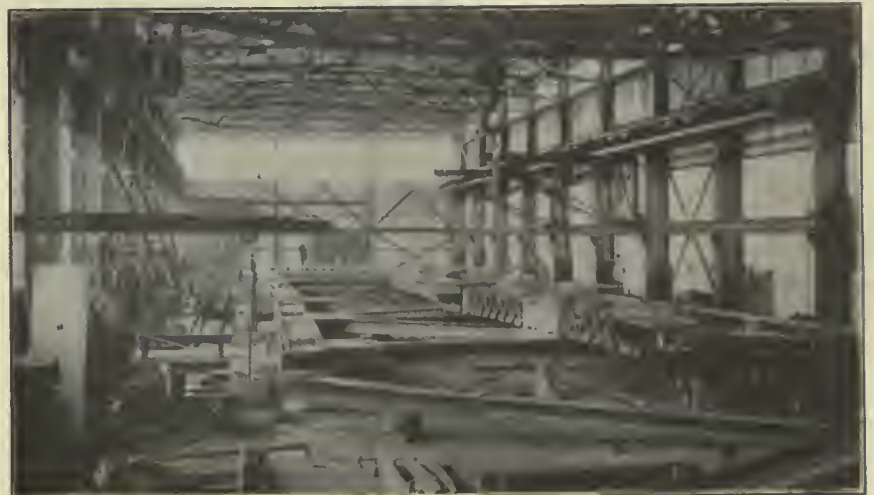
GIRDER SHOP, LOOKING WEST. HERE IS SEEN UNDER CONSTRUCTION A 240 FT. RIVETED THROUGH LATTICE RAILWAY SPAN.
